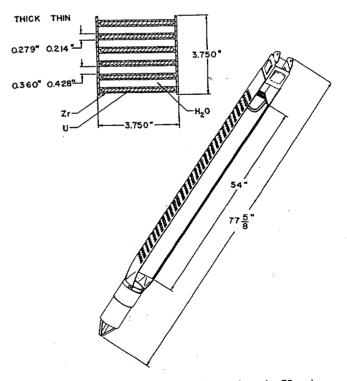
EBWR fuel element. The dimensions in SI units are in the text. The units of the dimensions in this figure represent the fabrication specifications. fuel plates are Zircaloy 2-clad uranium alloy plates, manufactured in 2 thicknesses. One plate is 137 cm long, 9.2 cm wide and 5.4 mm thick. The other plate has the same length and width dimensions, but is 7.1 mm thick. The nominal cladding thicknesses are 5 mm over the face of the uranium plates. 3 mm over the edges and 3.8 cm over the ends. This yields an effective heat transfer area of about 1100 cm² per face.
